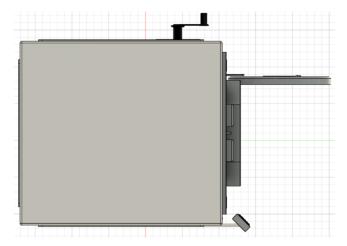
Sketch of the proposed washing machine design, viewed from the bottom. Designed using Autodesk Fusion 360.
